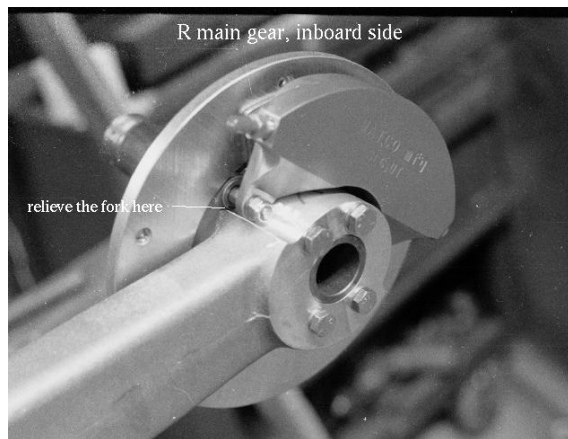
Disk and caliper on the right fork. You will have to relieve the outboard edge of the fork slightly to get the caliper to fit.
